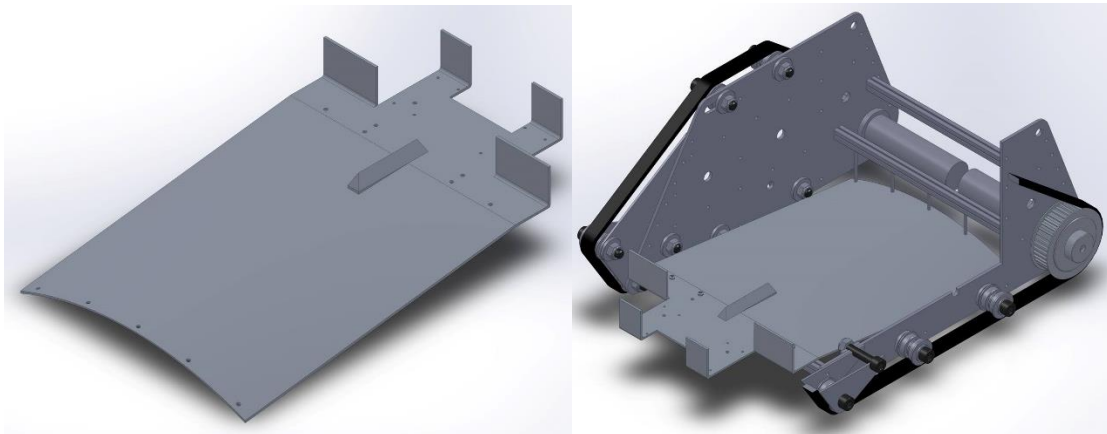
Storage plate and storage plate in cutaway of chassis assembly
